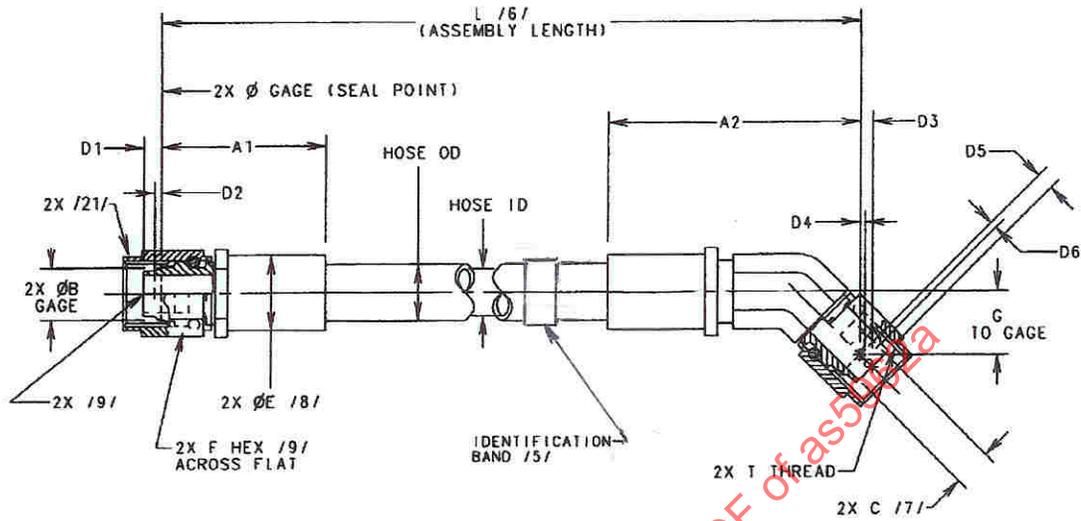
HOSE ASSEMBLY DIMENSIONS
